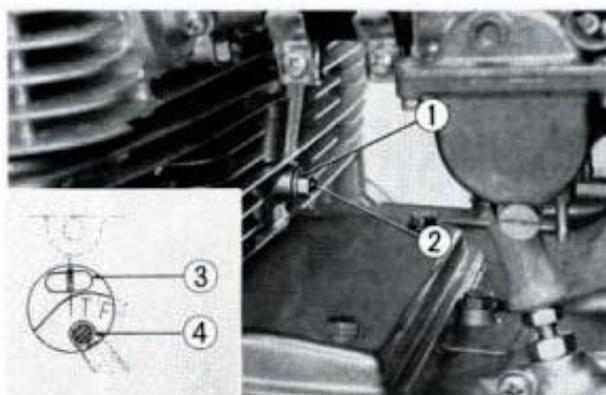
① Nut ② Adjusting screw ③ Timing mark ④ Spring peg
